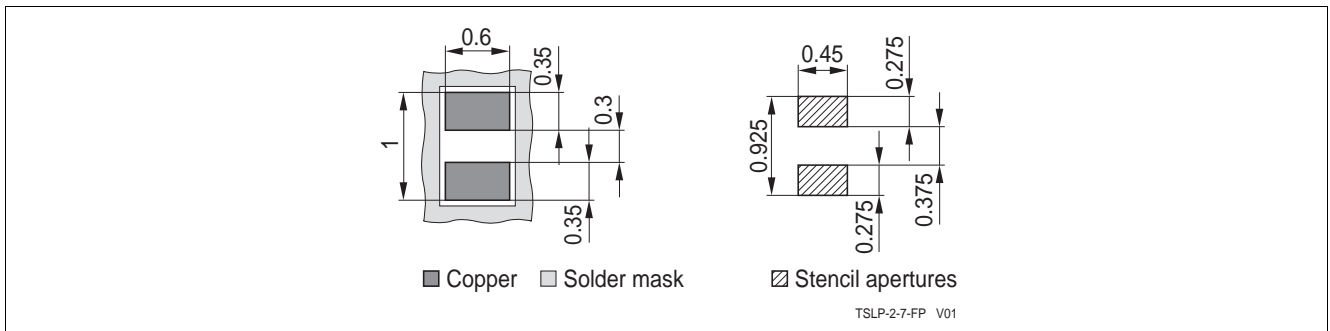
TSLP-2-17 Footprint (dimension in mm)
